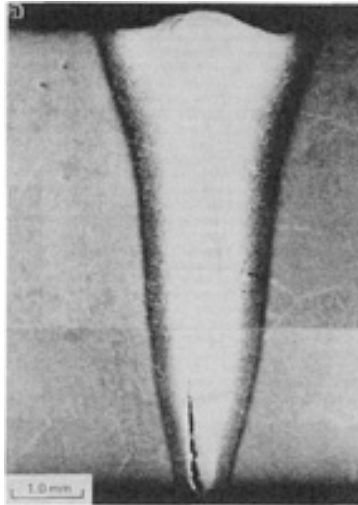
CRACKING IN ALPHA-2 ELECTRON-BEAM WELD
